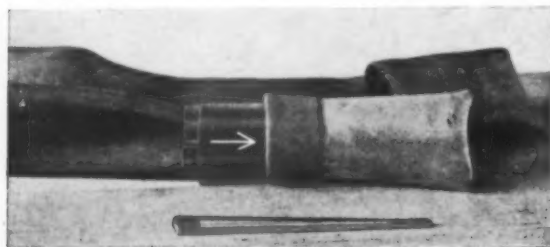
FIRST END DRAWN OVER THE EXPANDER
